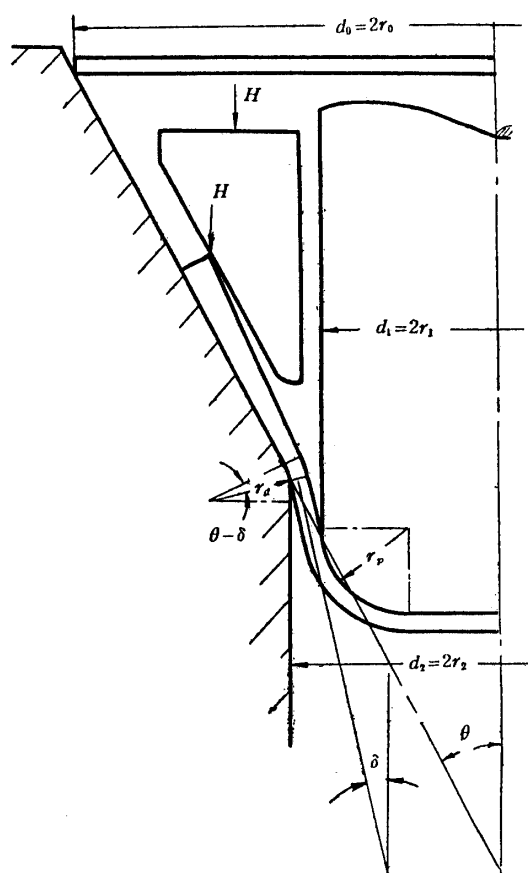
Manner of blank holding, and symbols for tool and blank dimensions.
